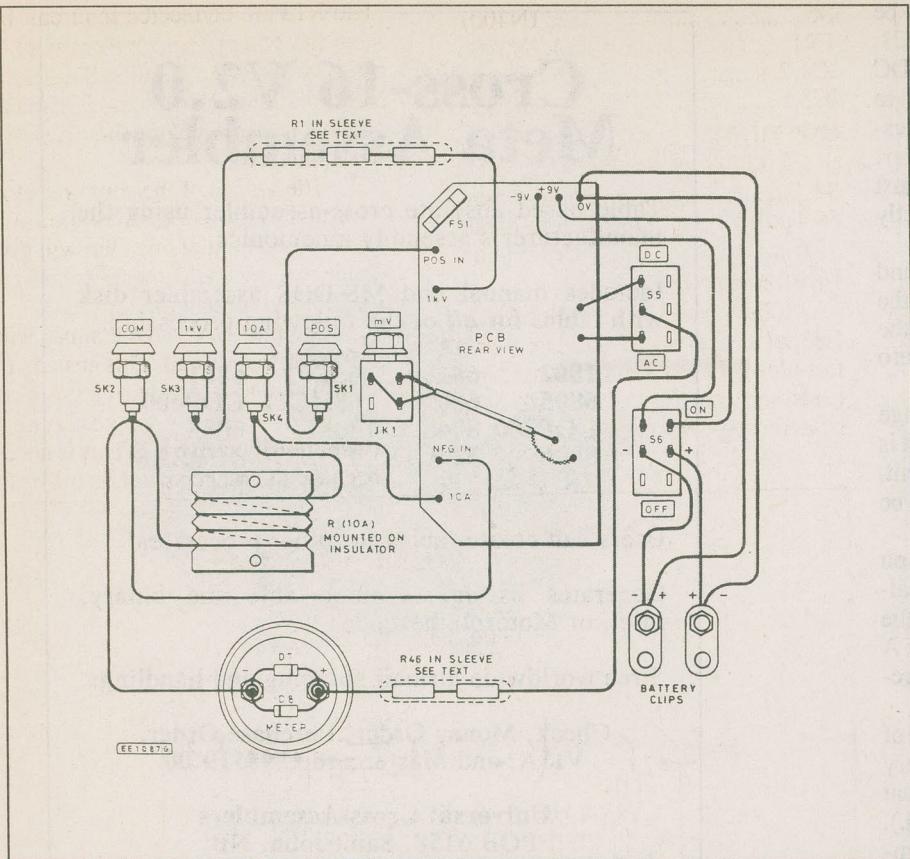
Interwiring details for the off-board components. The circuit board and components are all mounted on the rear of the front panel. The series resistors are encased in plastic sleeving.
